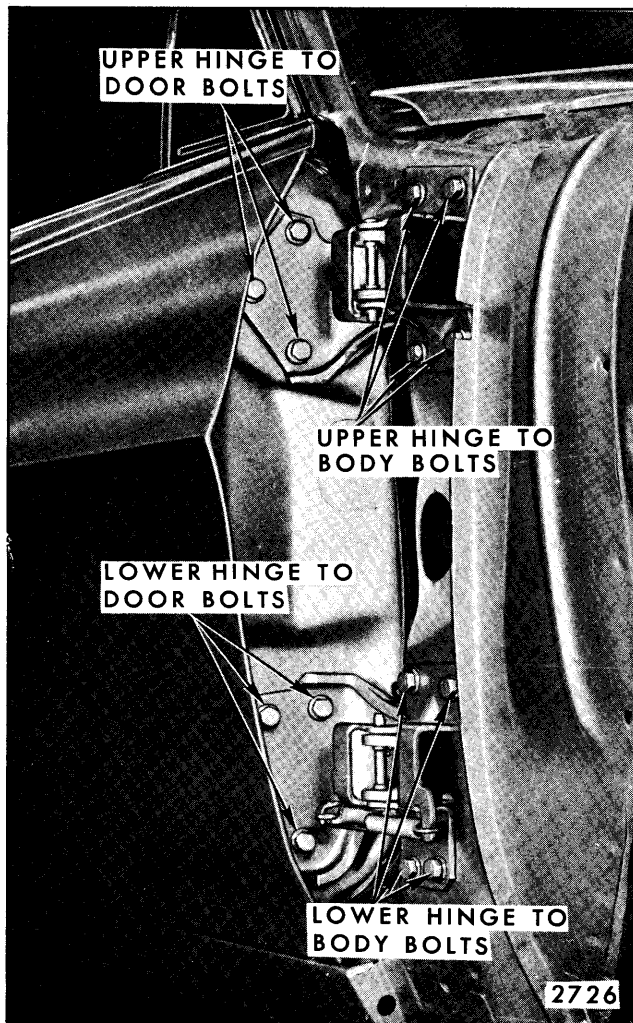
Front Door Hinge Attachment - "B-C & E" Styles
